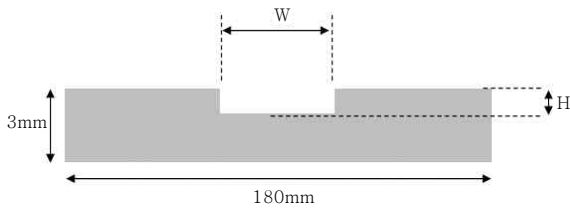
Schematic diagram of Backing plate design for bead shape control
